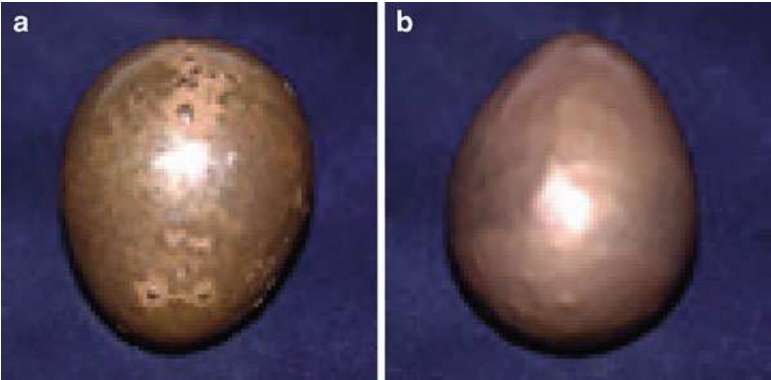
Surfaces of egg component (a) prior to machining and (b) after polishing using the tumbling method with Al_2O_3 #100
